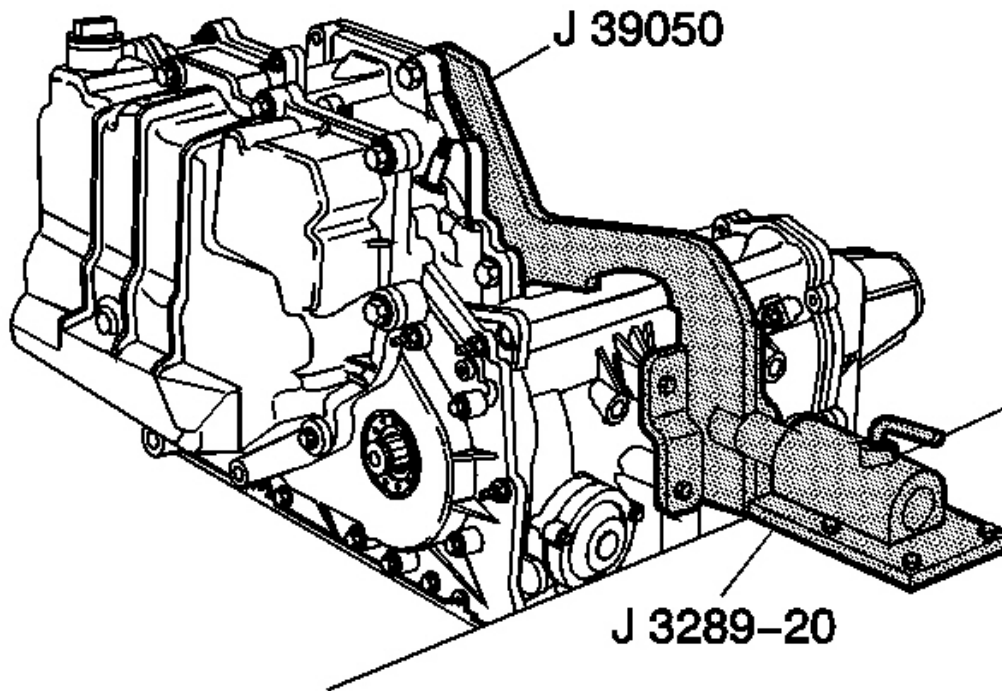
Installing J 39050 & J 3289-20 On Transmission
